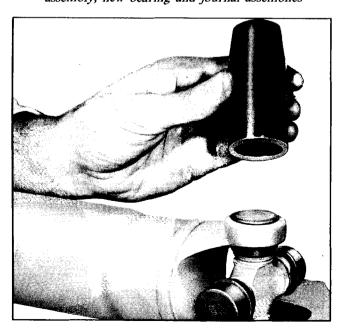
E-8 Removing Bearing From Yoke With 1-1/8" Pipe
